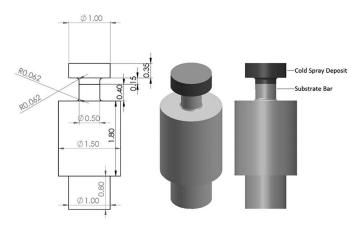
'Glueless' bond strength test specimen mechanical drawing (dimensions in inches).
